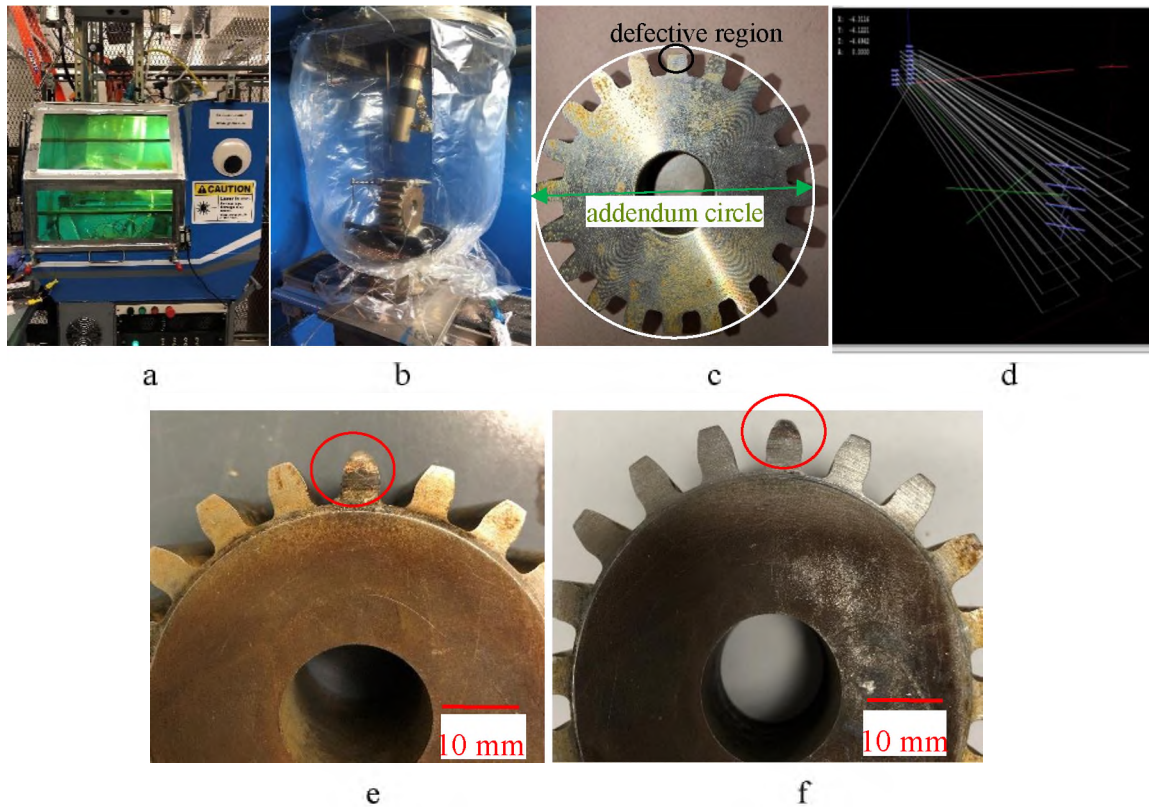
DMD equipment to perform repair experiment. (a) DMD system chamber; (b) DMD experimental set-up; (c) Damaged gear; (d) Tool path generation for material deposition; (e) Gear after DMD process; (f) Gear after machining.
